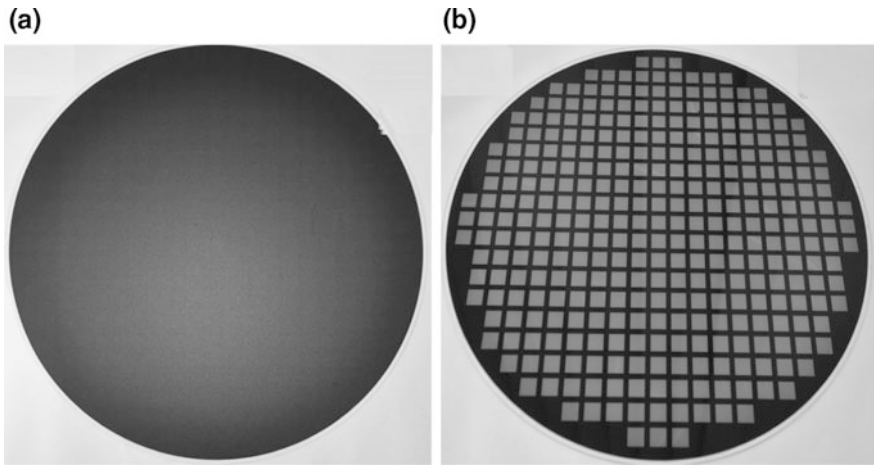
a Top view of a molded reconstituted wafer. b Bottom view of a molded reconstituted wafer without the LTHC-layer so we can see the test chips
